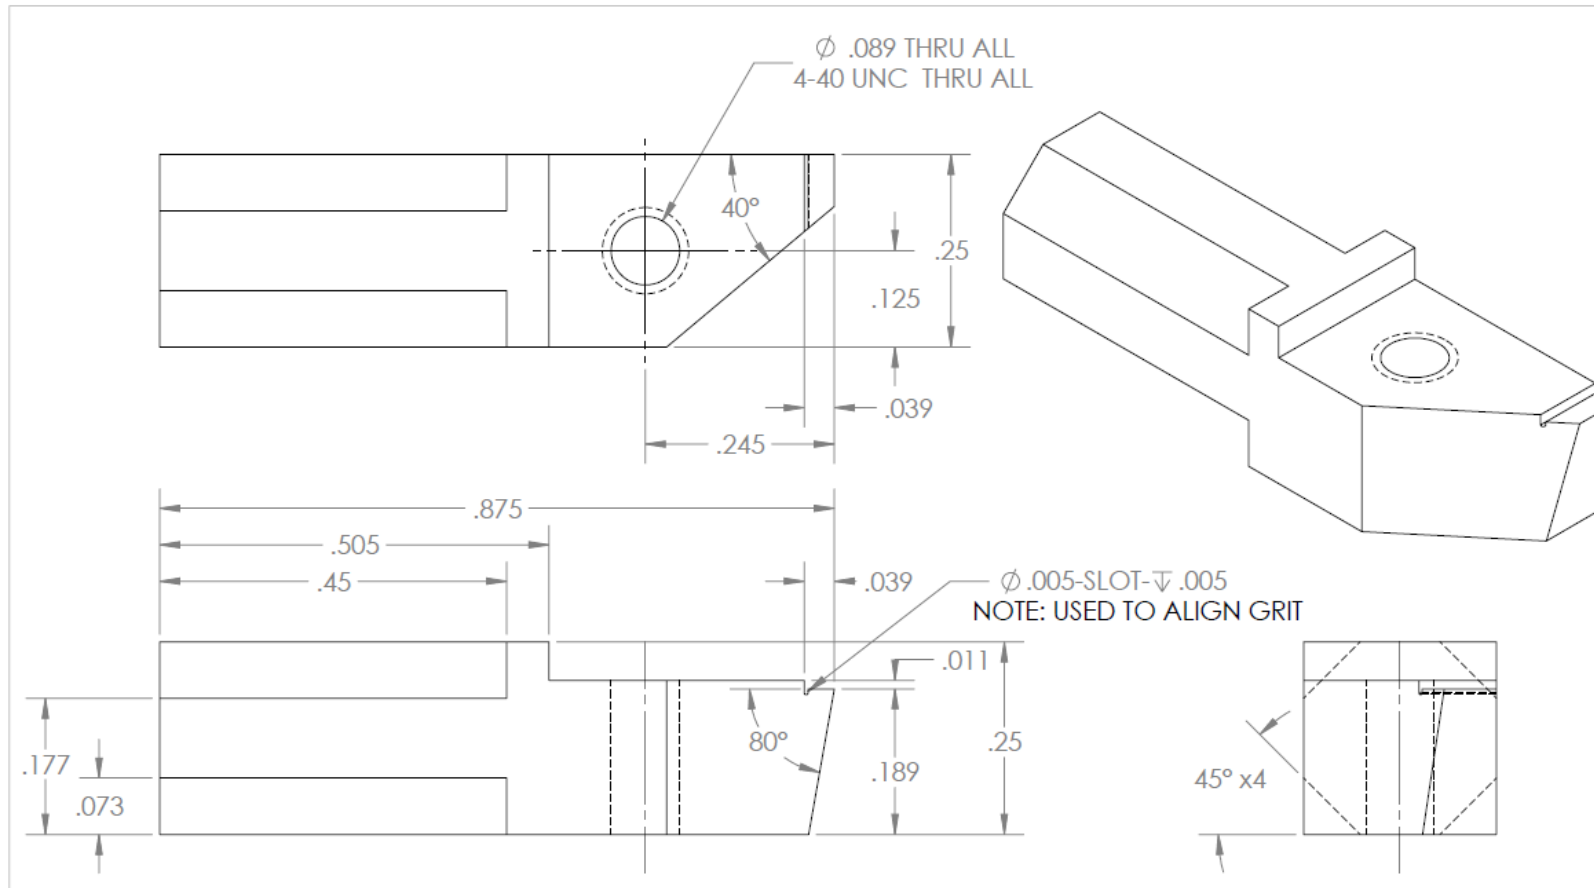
Grit Holder Dimension Drawing: Units are in Inches
